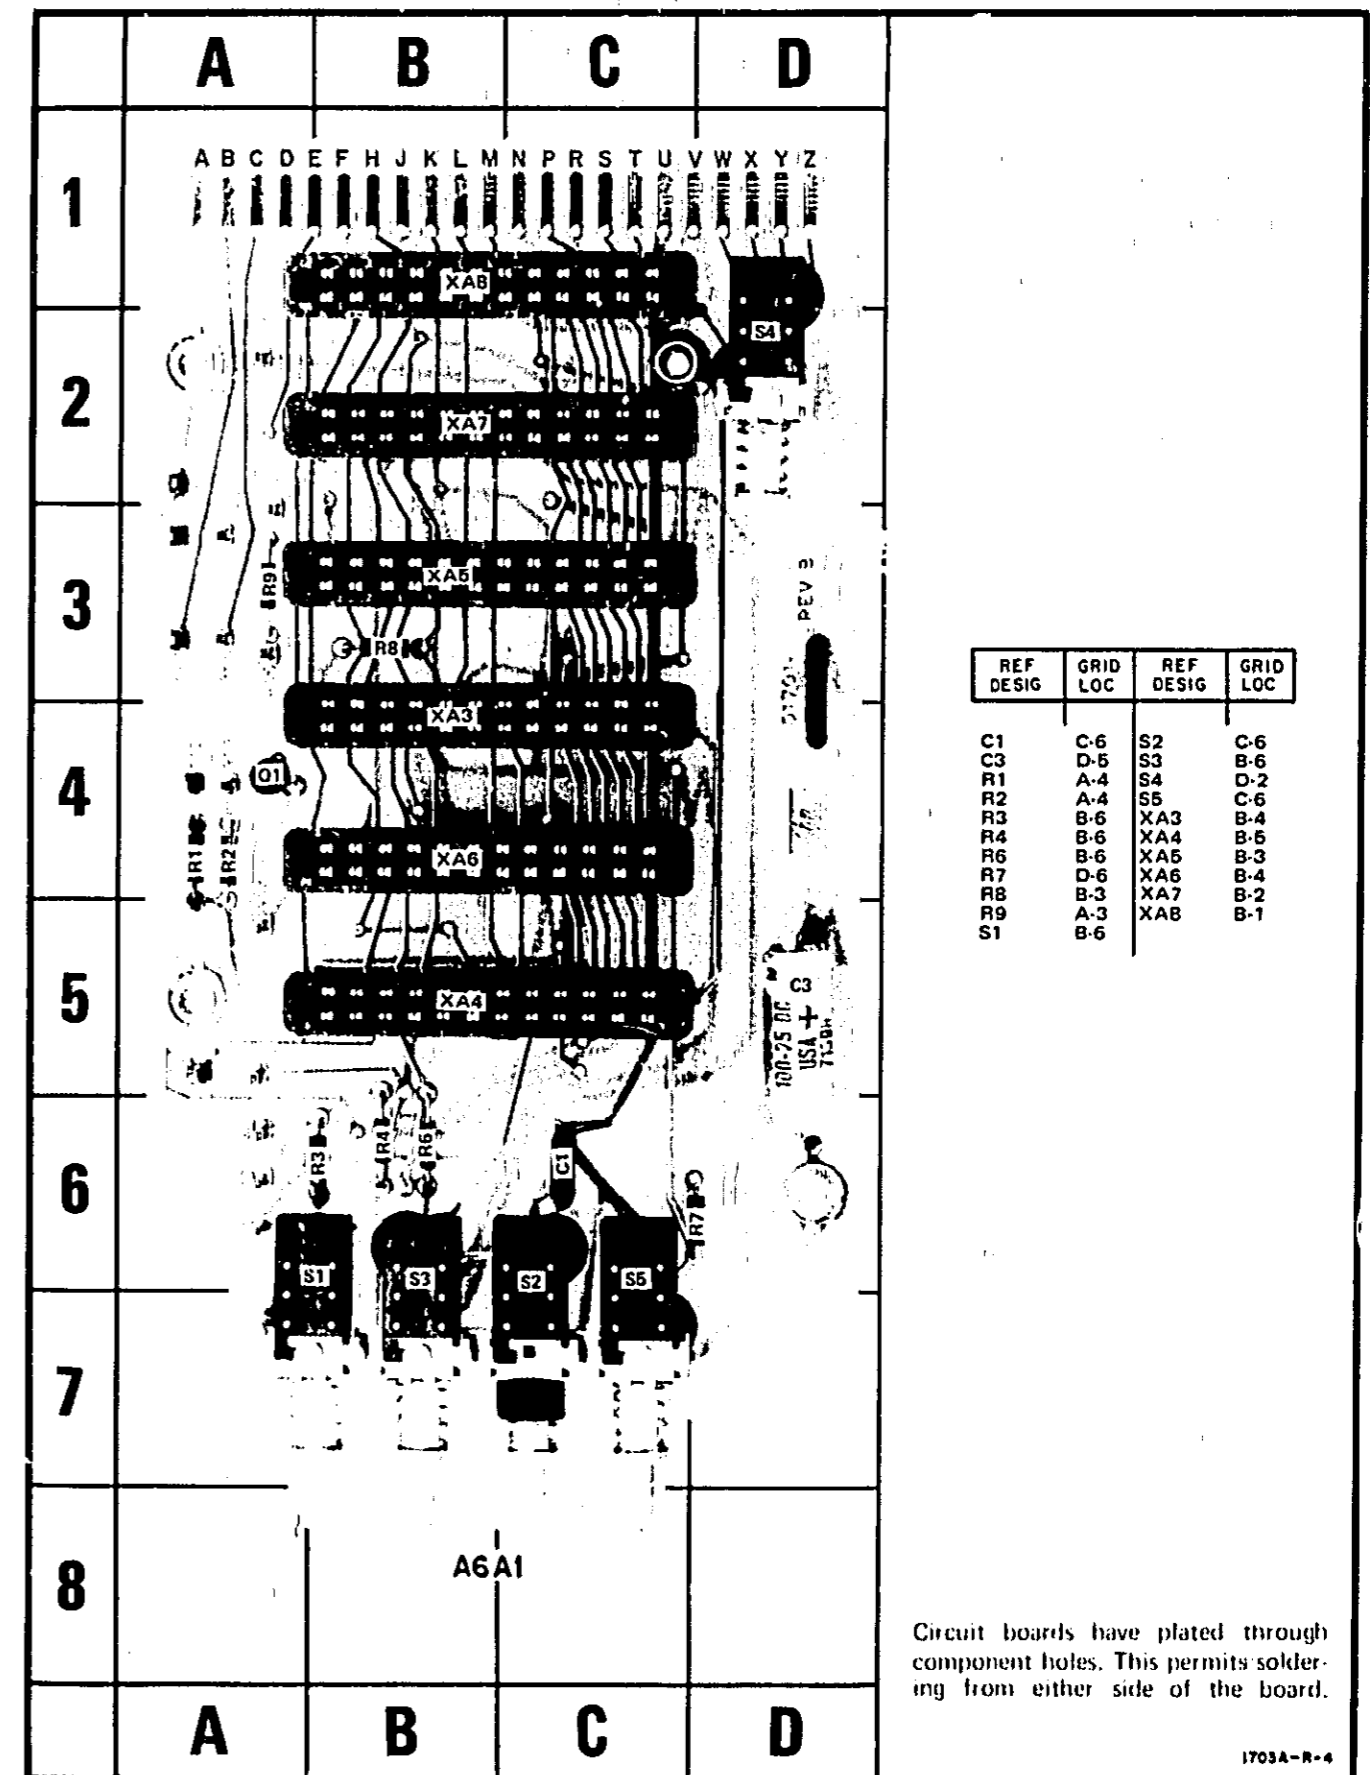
Horizontal Mother Board, A6A1, Component Identification
